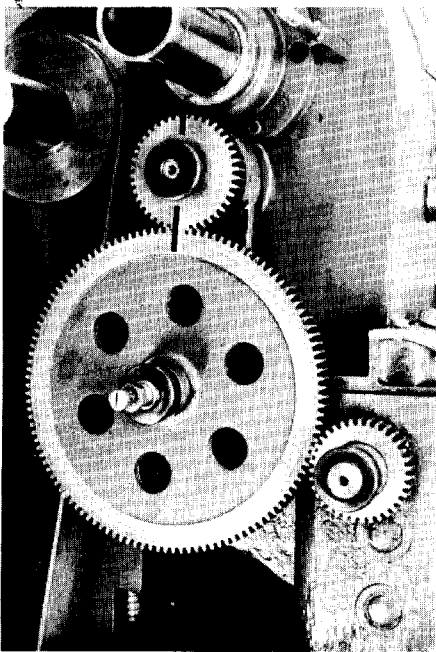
Marking the spindle and intermediate gear before indexing the workpiece exactly one-half turn for cutting a double thread.
